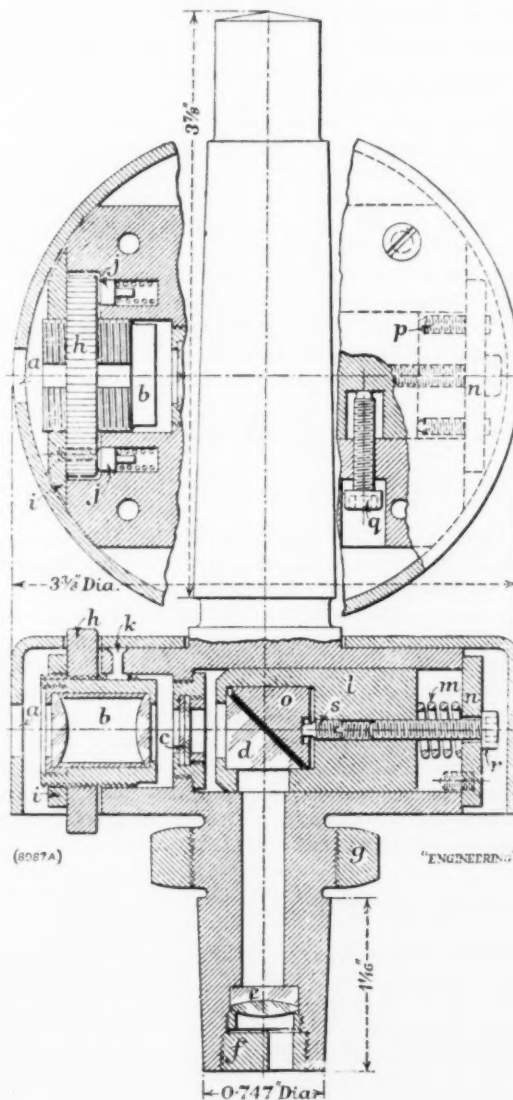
DRILL CHUCK WITH OPTICAL CENTERING DEVICE
